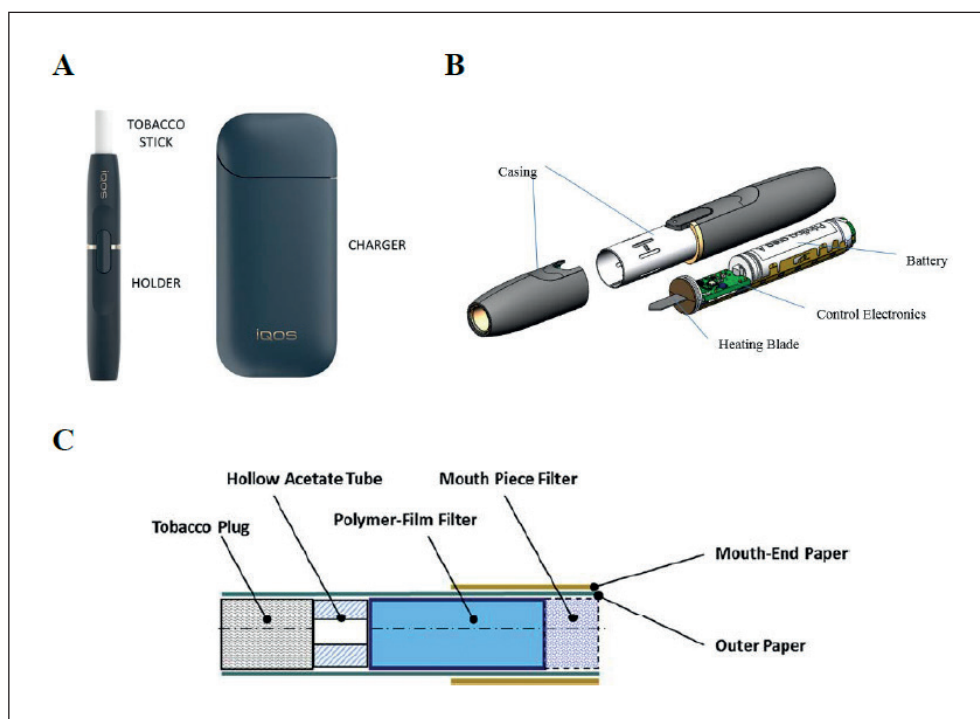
THS 2.2 components (A), a schematic exploded view drawing of the Holder (B), and a schematic cross-sectional view of the Tobacco Stick (C) (adopted from fda.gov)
